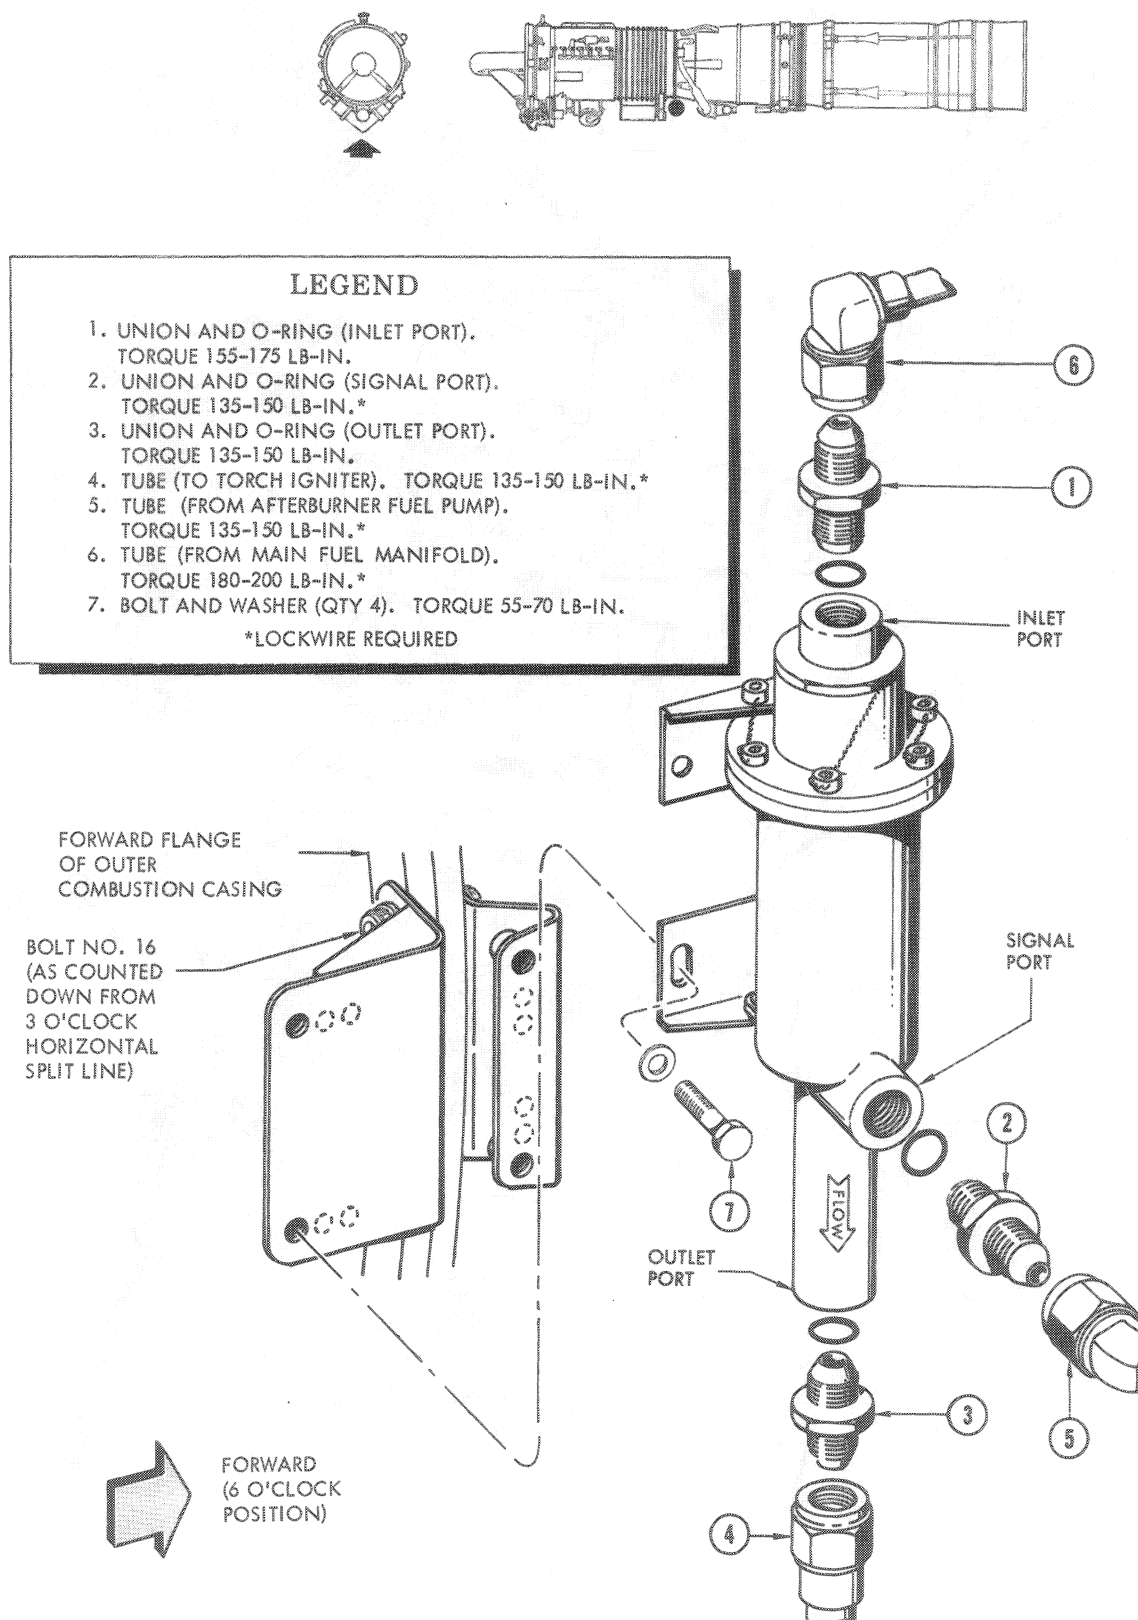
Torch Igniter On-Off Valve Removal and Installation
